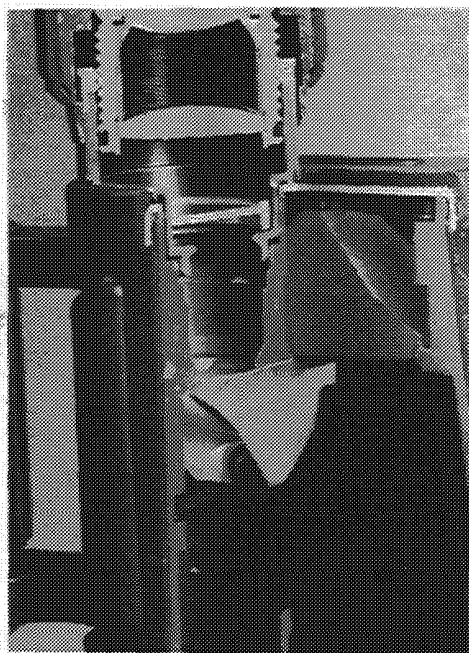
Clamping a Porro prism system with a spring in a prism seat.
